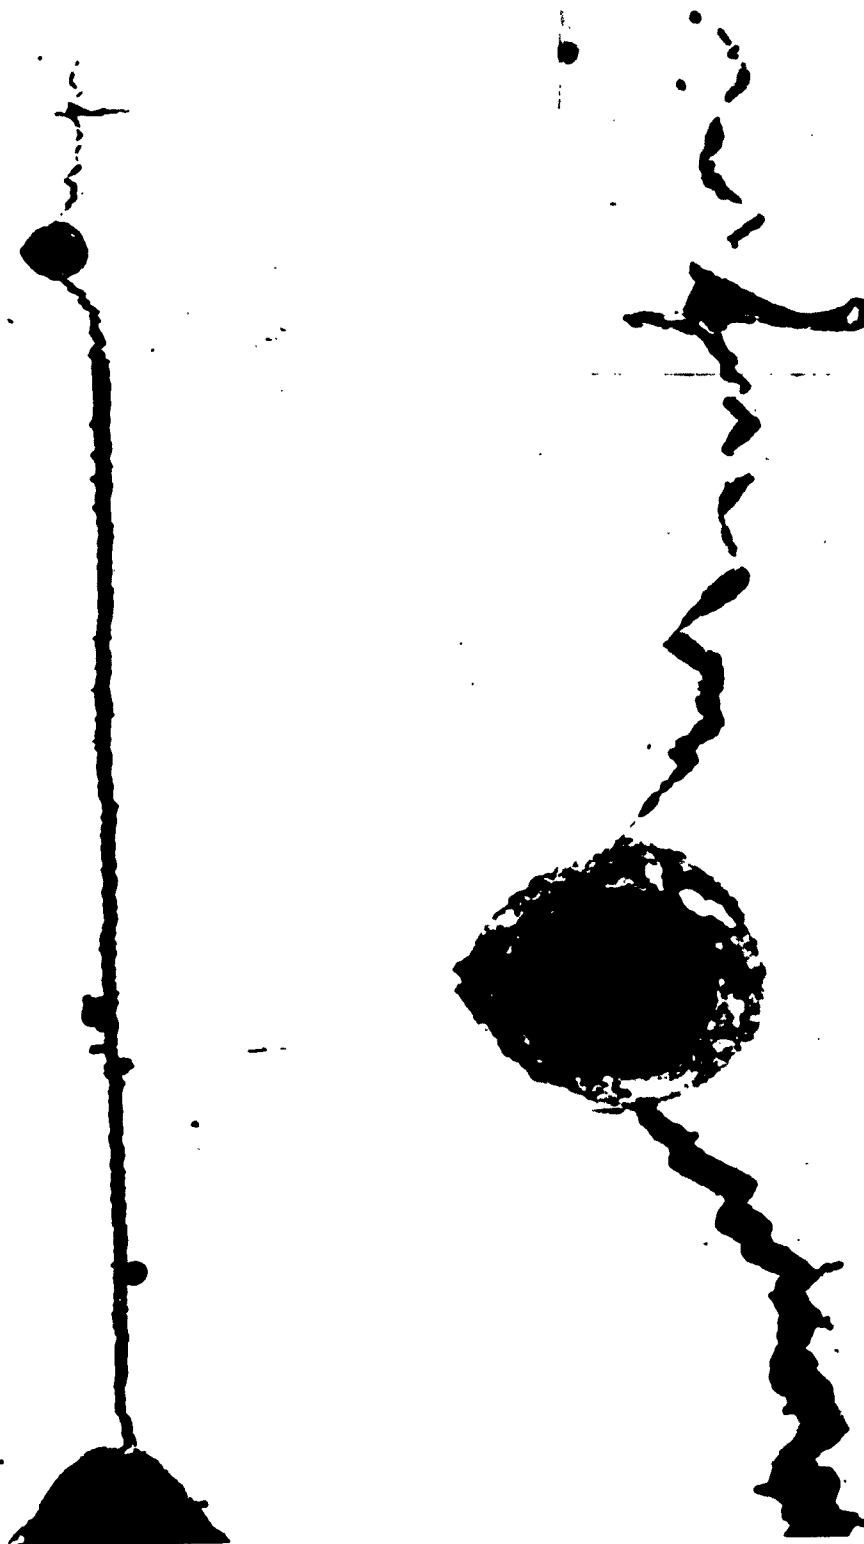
Longitudinal section along the axis of a specimen tempered at 800°F unloaded and sectioned prior to catastrophic fracture. Unetched. (a) Fatigue crack on the left (parallel sides) beginning at notch root, with stable crack extending through inclusion at the right, 125X. (b) Enlarged view of the stable crack in (a), 700X. Load was applied normal to the fatigue crack.
